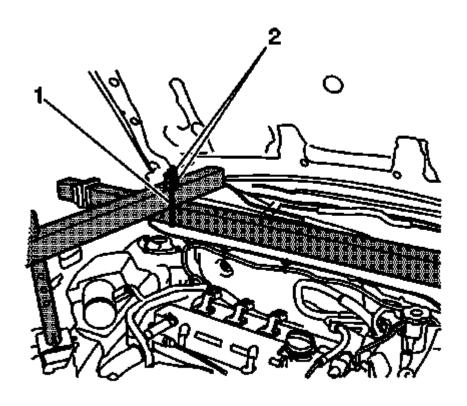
Cross Bracket Assembly And Wing Nuts Courtesy of GENERAL MOTORS COMPANY
